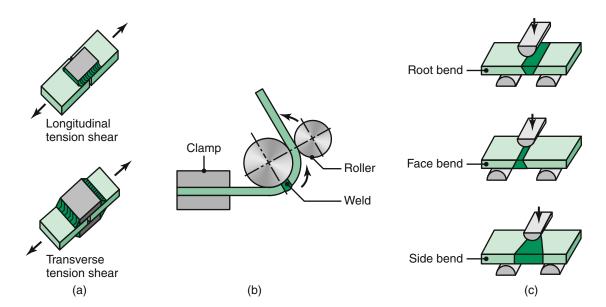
(a) Specimens for longitudinal tension-shear testing and for transfer tension-shear testing. (b) Wraparound bend-test method. (c) Three-point transverse bending of welded specimens.
